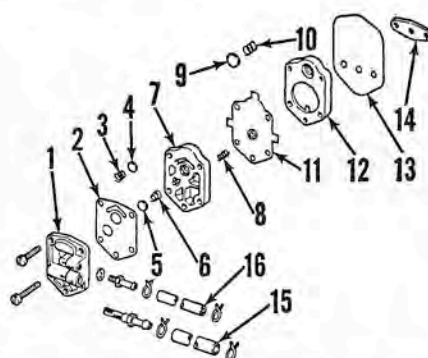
Exploded view of fuel pump assembly typical of that used on some late motors.
